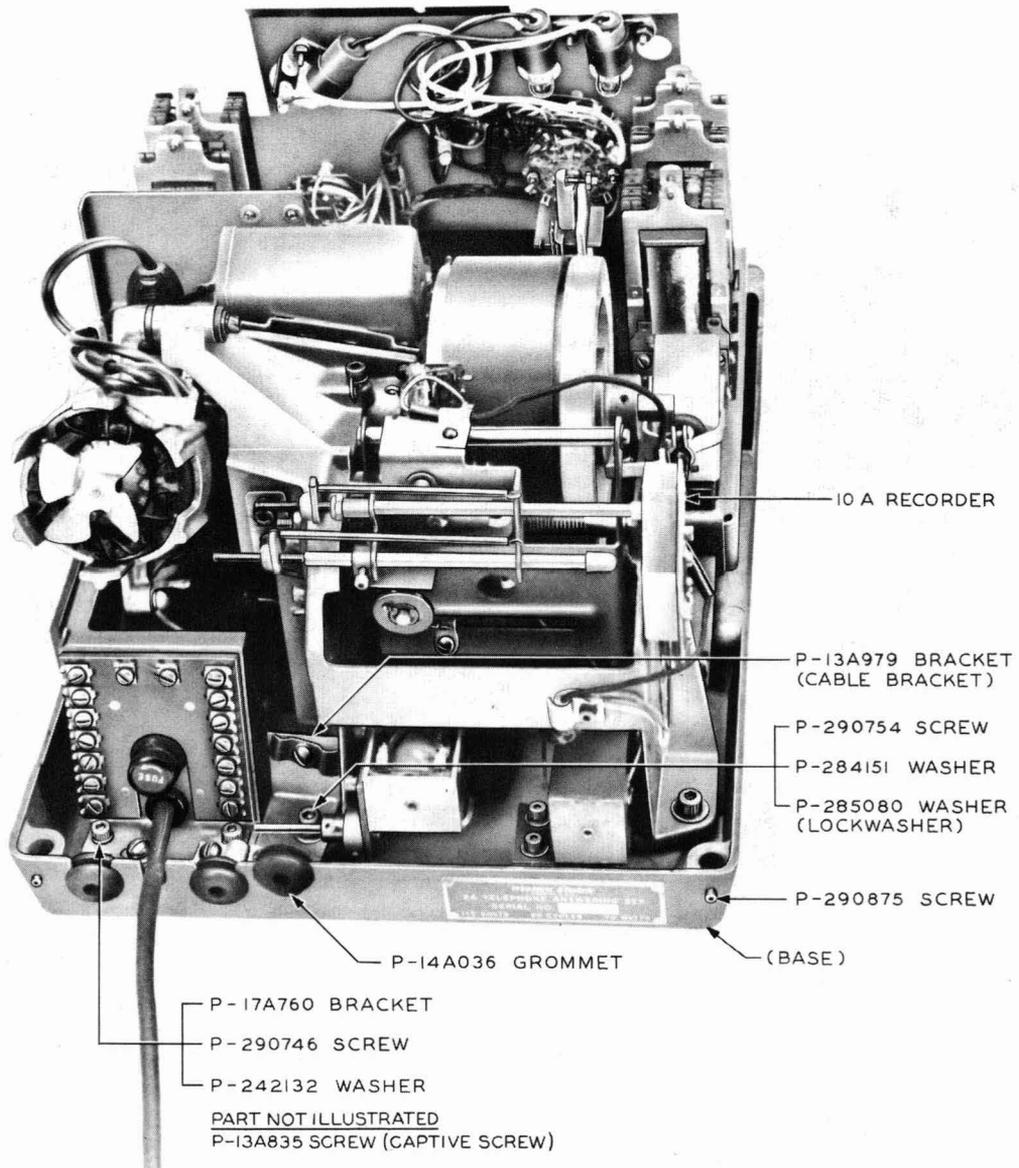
Modified 2A Telephone Answering Set (rear view with cover and amplifier removed)
